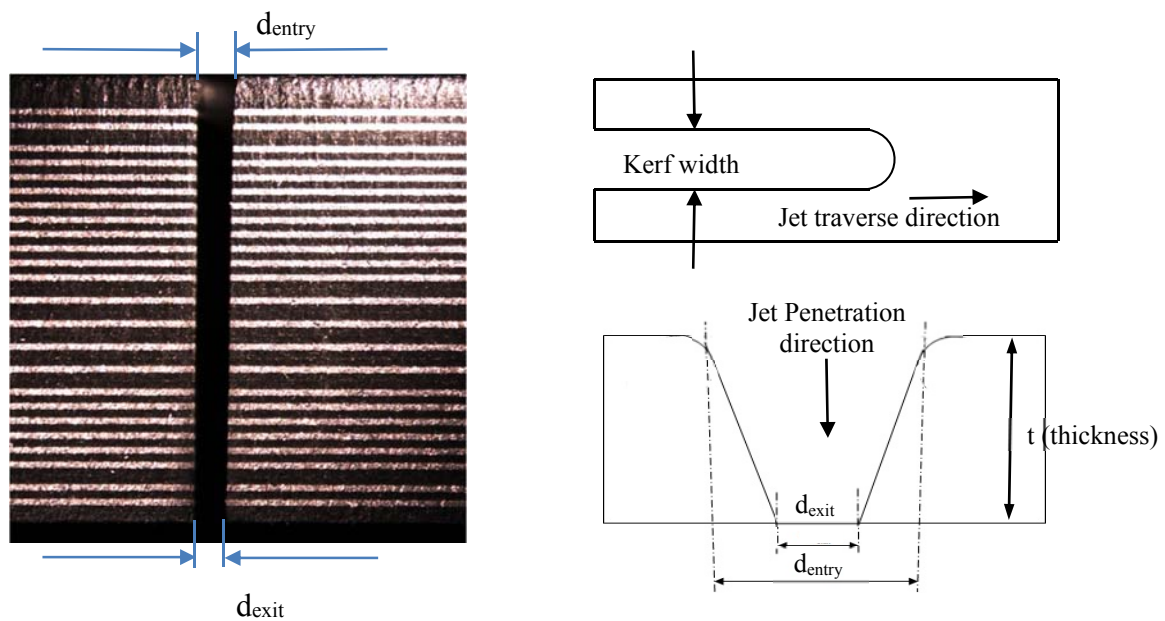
Kerf dimensions for straight cut AWJ machined profile
